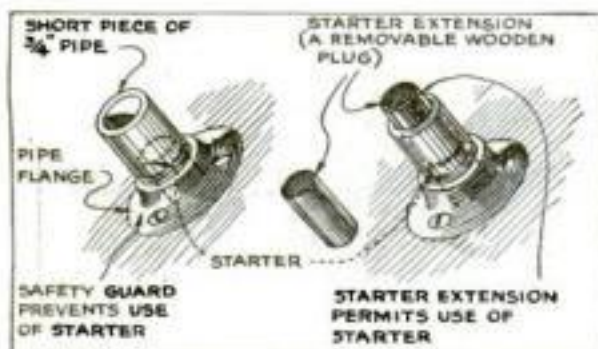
A pipe flange fitted over starter, with plug to work it, makes car safe for children.
